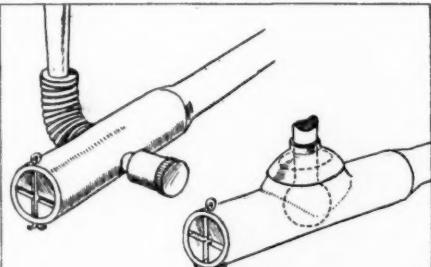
Left—Suggested type of joint with a short piece of flexible metallic tubing for holding grease or oil
